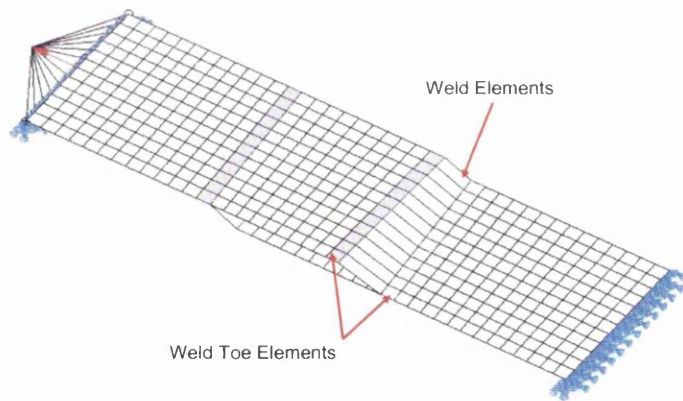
FE Model Showing Weld and Weld Toe Element Location
